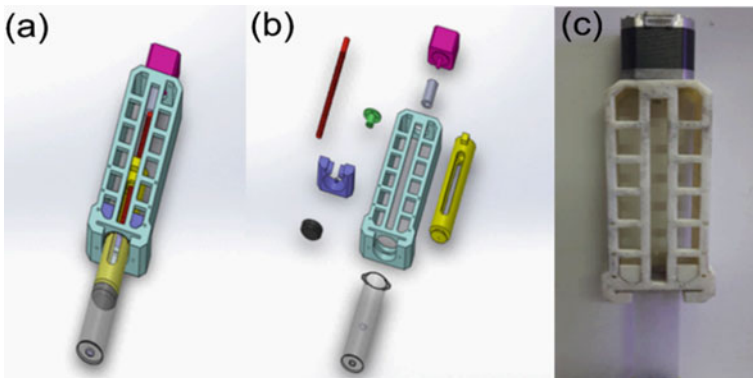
CAD model and physical model of augur screw extrusion system; a CAD assembly, b exploded view of assembly, c physical model assembly
